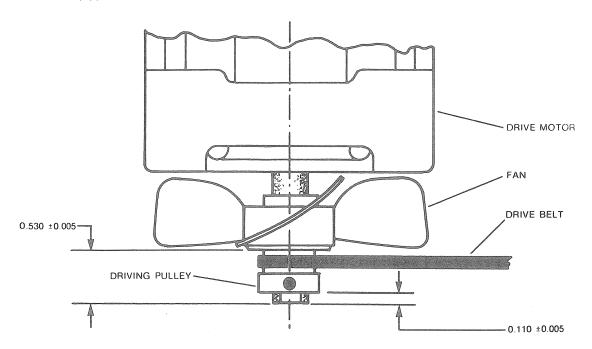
DRIVE PULLEY AND FAN INSTALLATION SPECIFICATIONS
